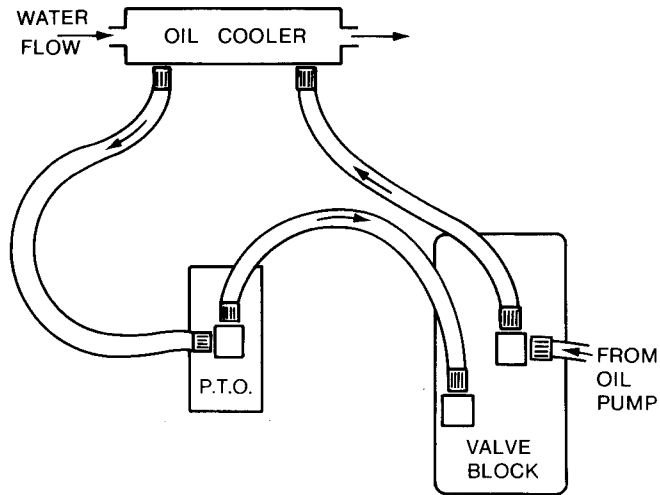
Oil Cooler Connections — PRM 601M, with Power Take Off.
